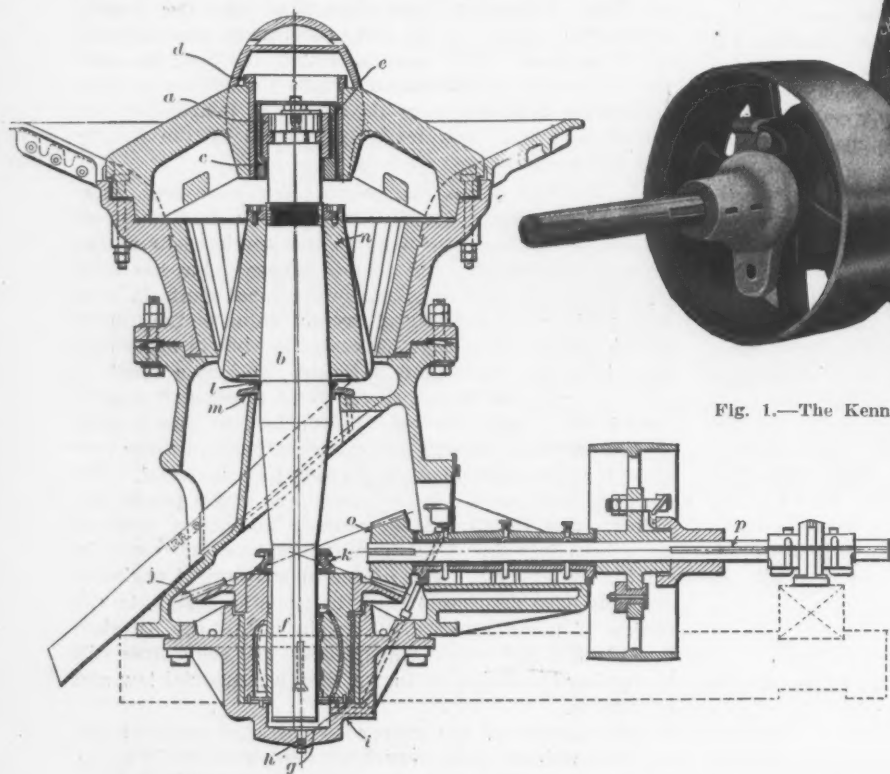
Sectional View of the Kennedy Gyratory Crusher.
